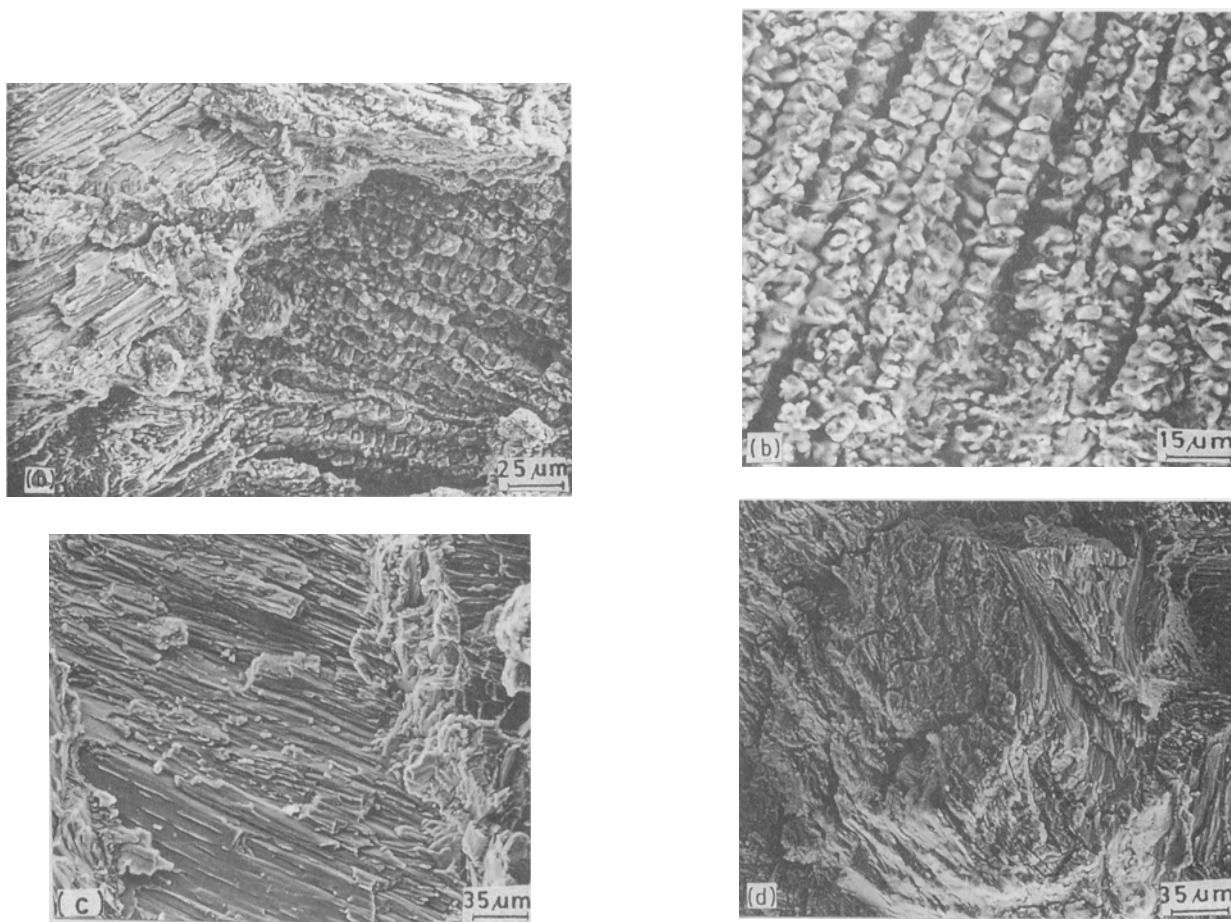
Typical high-magnification fractographs of weld metal aged at 873 K and tested by constant load technique in boiling MgCl_2 solution at 427 K, showing (a) a combination of interface cracking and SCC of austenite, (b) interface cracking, and (c) and (d) SCC of austenite.
